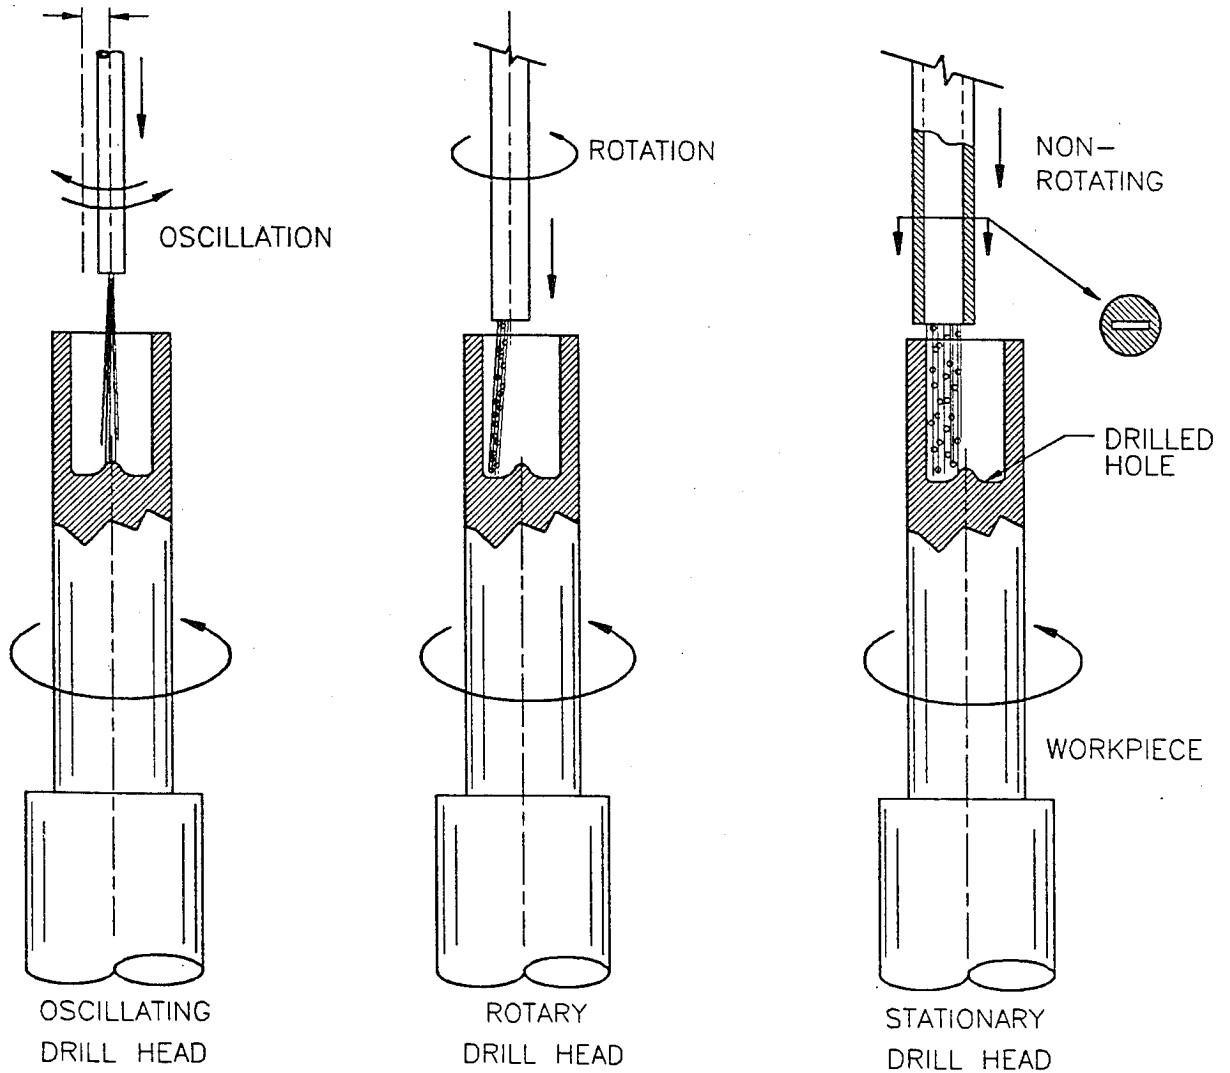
Concepts of Deep Hole Drilling and Their Kinematic Parameters
